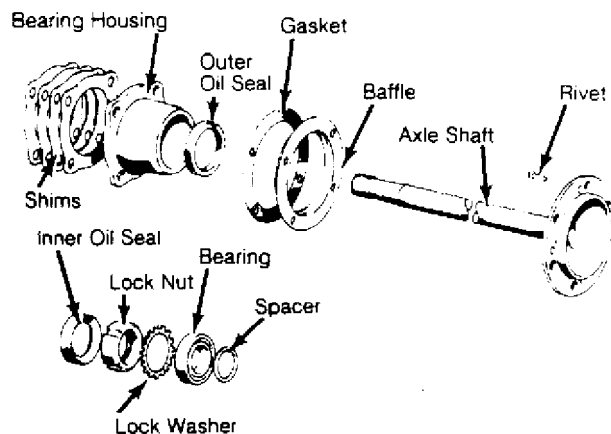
Exploded View of Pickup Axle Shaft Assembly
